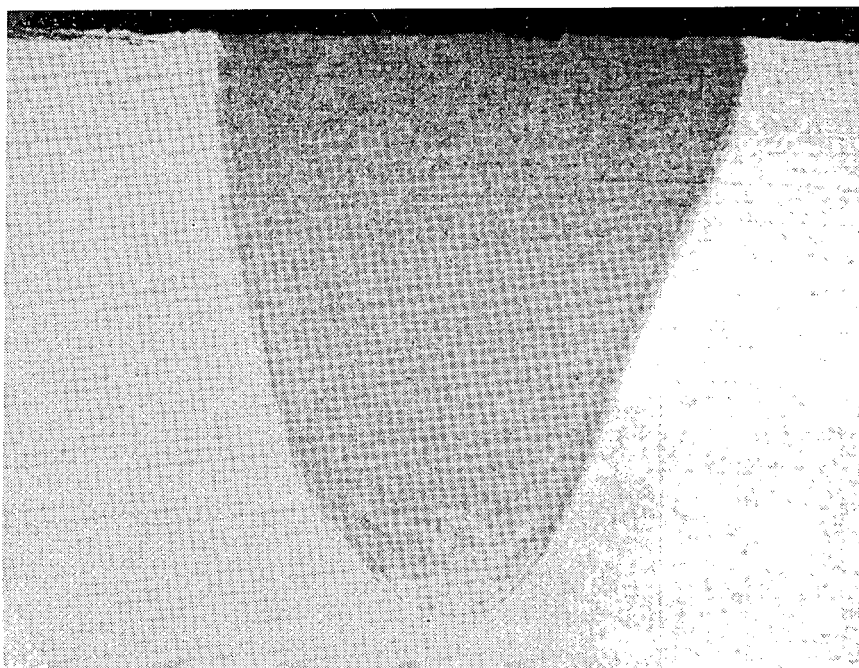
Cross section of weld shown in Figure 3 (20 X).
